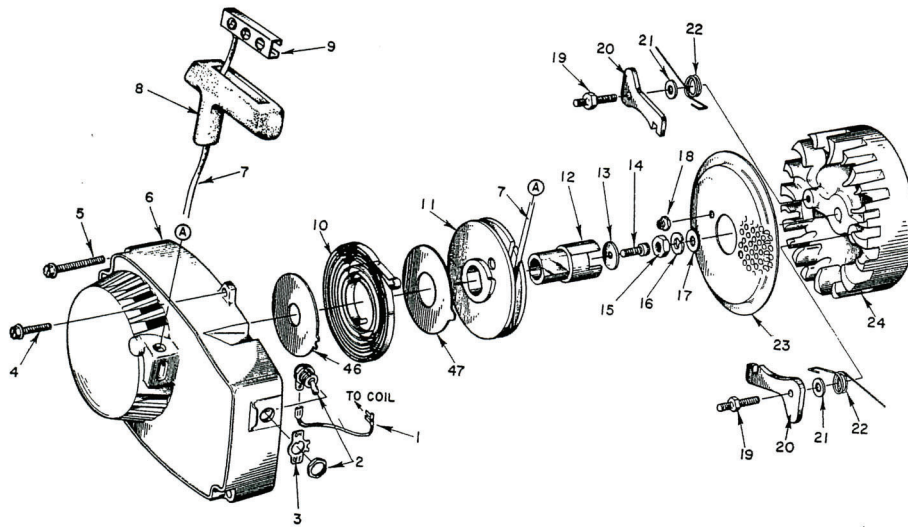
A — Exploded view of late rewind starter and related parts. Plastic shields (46 and 47) keep sawdust out of rewind spring (10) and dampen noise.
